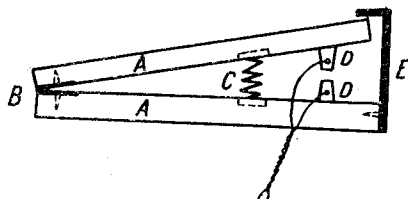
Motor foot switch. "A.A." wood battens, 1 ft. by $\frac{3}{4}$ in. thick by 4 in. wide, hinged at "B." "C"—motor-cycle type valve-spring in recessed seating. "D"—brass electrodes. "E"—vertical iron strip as limit stop
